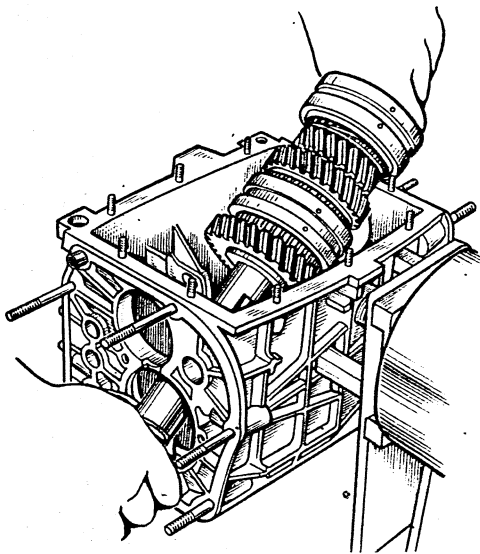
Removing the Main Shaft from Gearbox Housing
